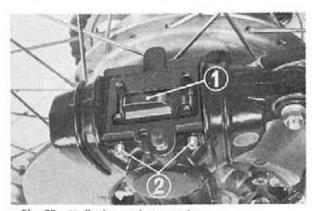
(1) Brake pad set spring (2) Brake pad pin
